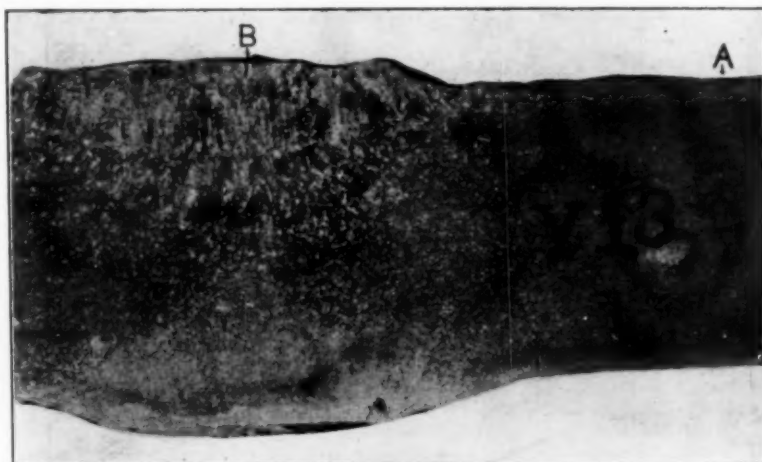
CRACK IN BOTH PLATE AND WELD OF SPECIMEN B; MAGNIFICATION 3.2
